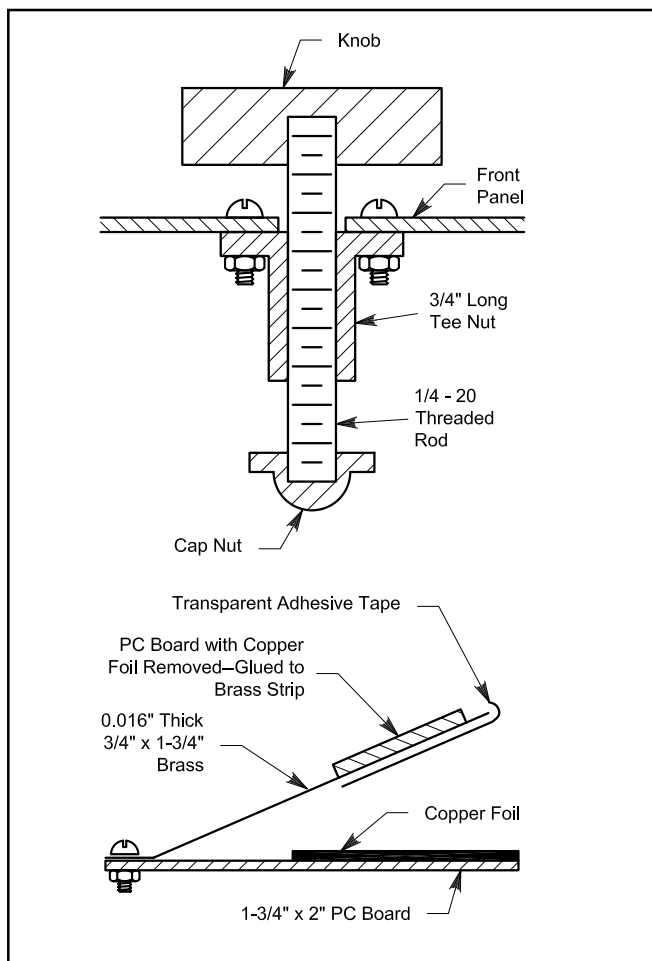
Mechanical details of the assembled compression capacitor. The spacers that hold the PC-board assembly approximately 1/4 inches from the front panel are not shown here. They are present in Figure 3.
